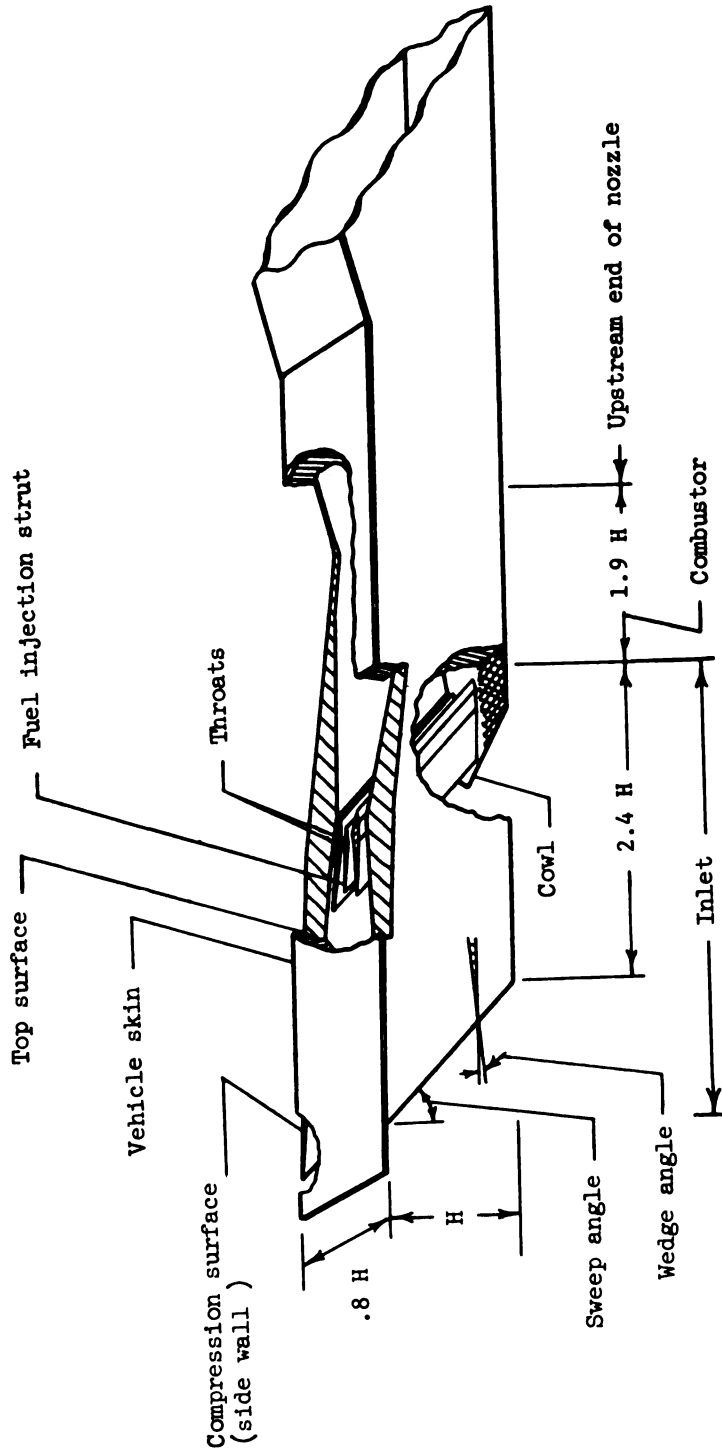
Inner module of scramjet engine concept (ref. 8).
